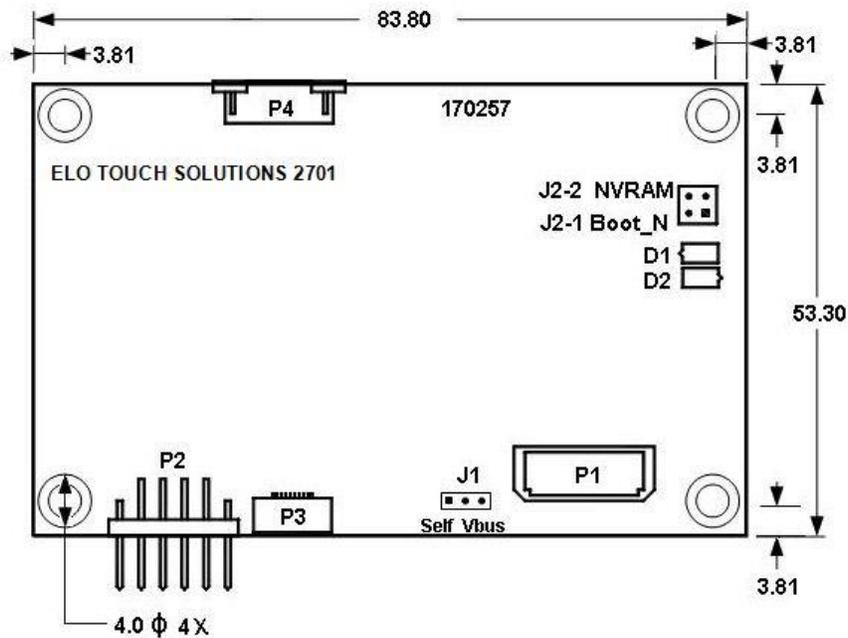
2701 Dimensions: Top View (CTR-270100-IT-RSU-00R)
